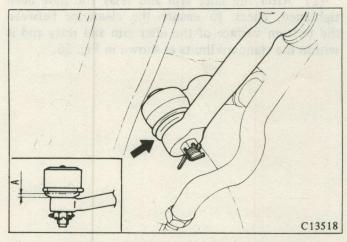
Checking Relay Rod-to-Pitman Arm and Relay Rod-to-Idler Arm Clearance
